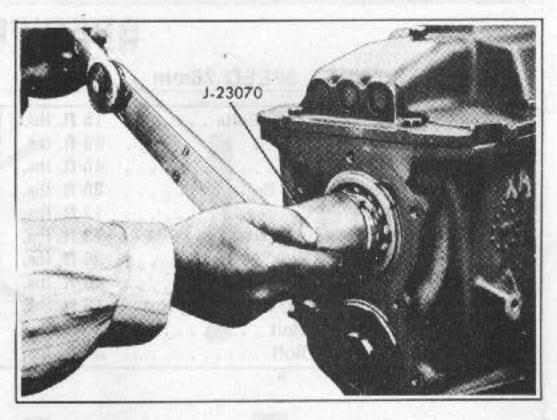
B-26L-Installing Mainshaft Rear Bearing Lock Nut (4-Wheel Drive only)
